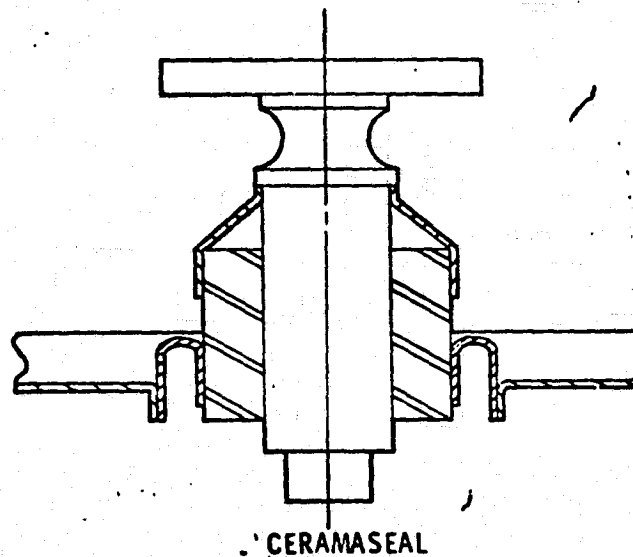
CERAMIC-TO-METAL SEAL TERMINAL CROSS-SECTIONAL VIEW
